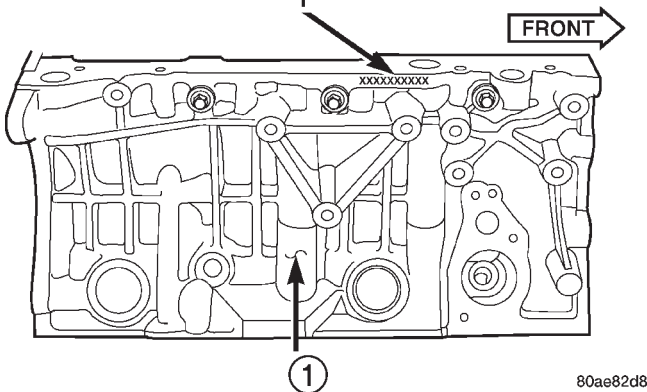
Cylinder Block Main Bore Grade Marking Location
